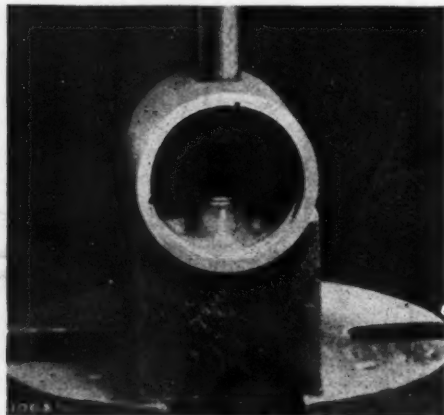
Special fitting used to remove Ford wrist pin bushings without damaging pistons
